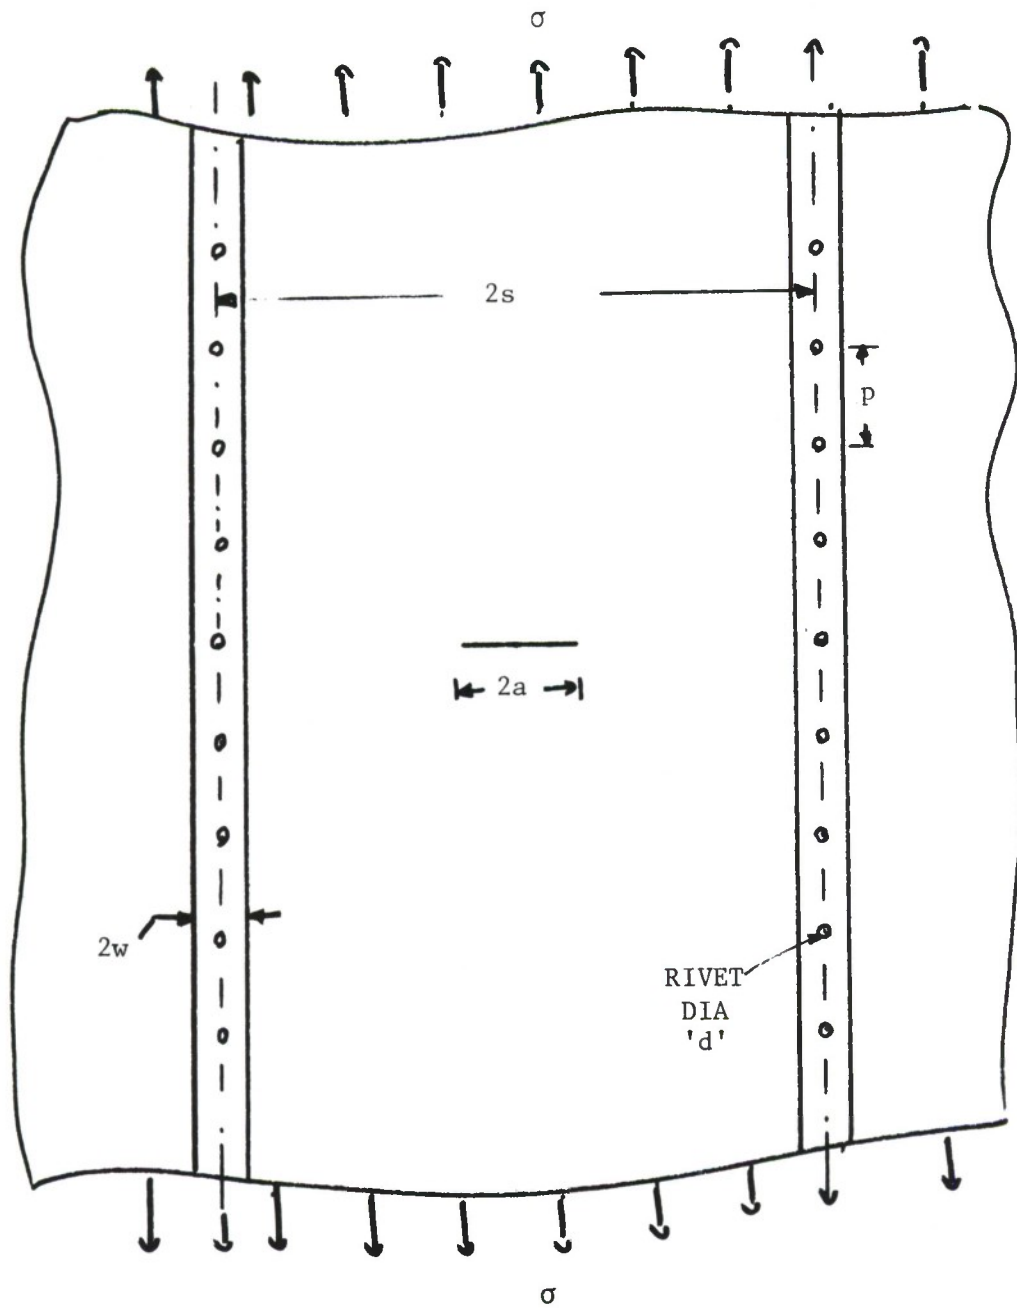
Riveted Panel with a Central Crack Between Two Stringers.
